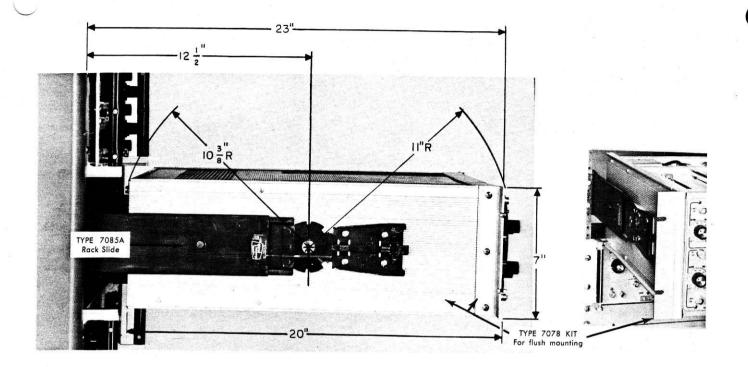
Type 767H Oscilloscope Showing Clearance Dimension for Installation of Type 7085A Rack Slides and Type 7078 Kit for Flush Mounting
